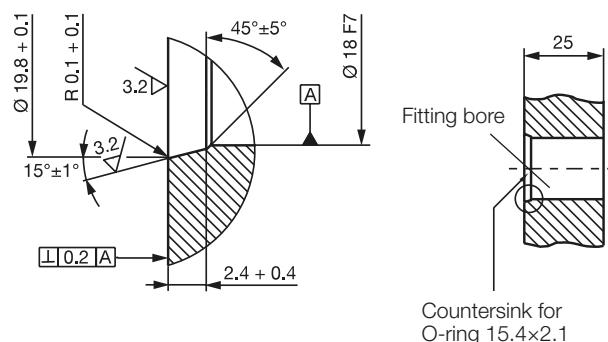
Fitting bore for installing the BTL with O-ring
